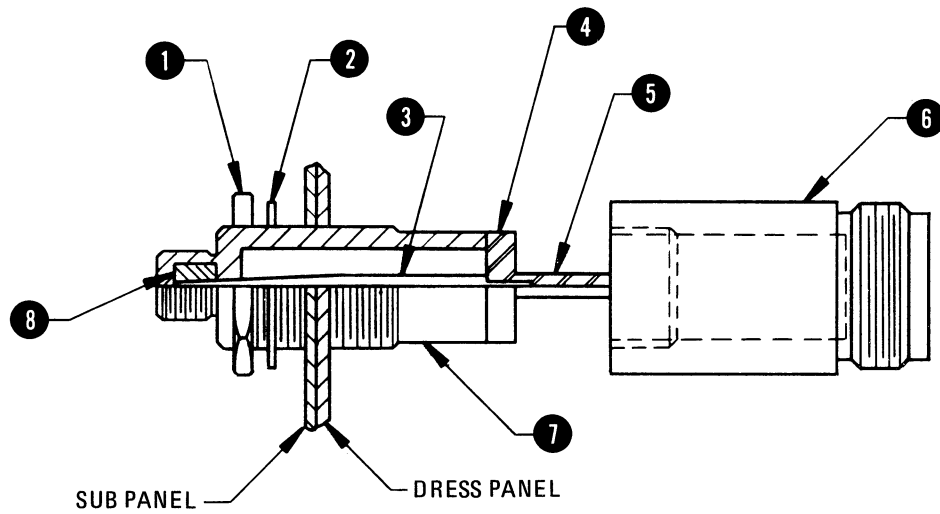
Main Chassis Assembly Mechanical Parts
